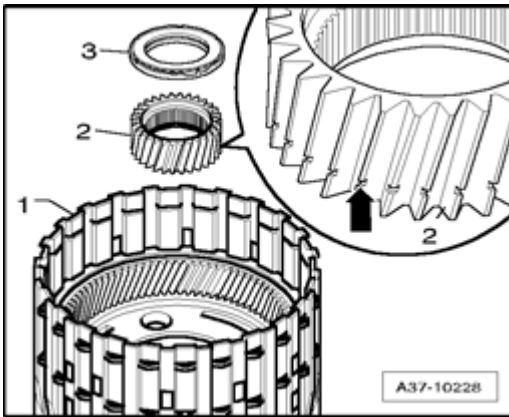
Axial Needle Bearing, Sun Gear And Ring Gear "I"
